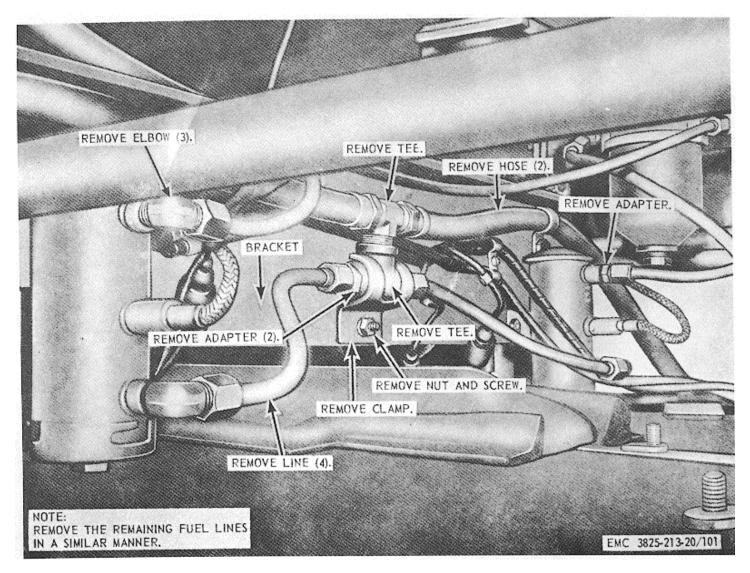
Plow and carrier engine fuel lines and fittings, removal and installation.
